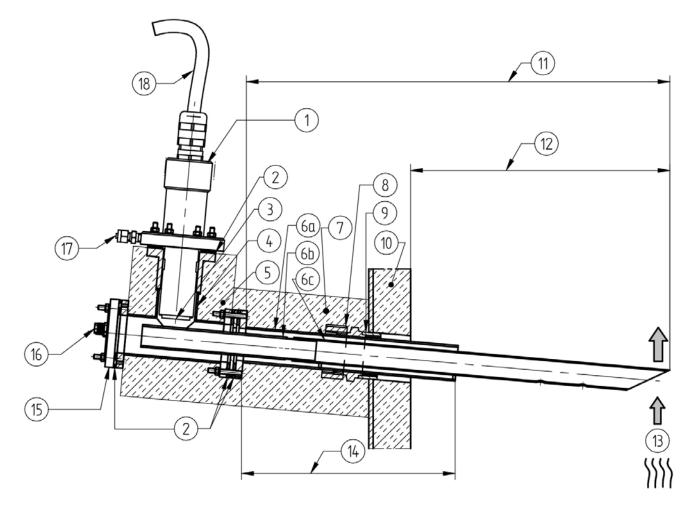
Ex Probe with GED FLEX made of Inconel or stainless steel with T-adapter
